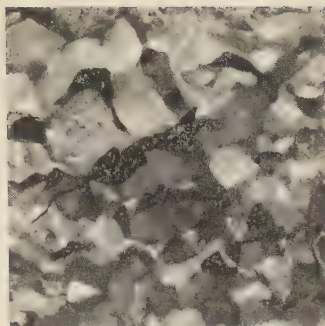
Fracture of severely overheated steel, showing coarse granular fracture.  $\times 10$ .
